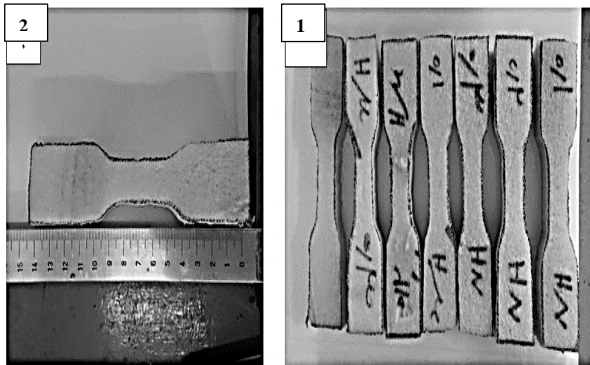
1) Standard samples of tensile Test, 2) Dimensions of standard samples
